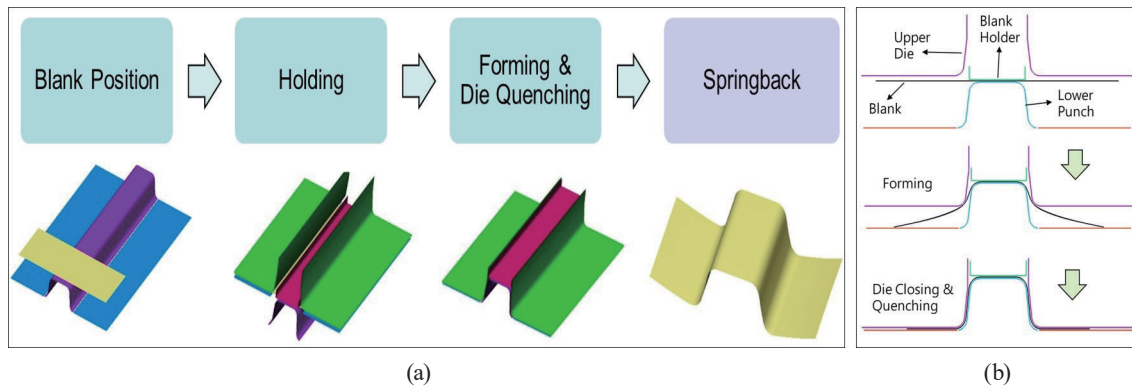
(Color online) (a) Simulation procedure for the springback of warm and hot forming and (b) cross-sectional view of the forming process.
